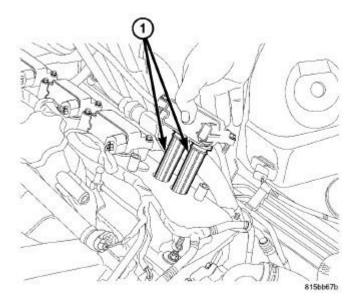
Removing/Installing Ignition Coil Courtesy of CHRYSLER LLC
